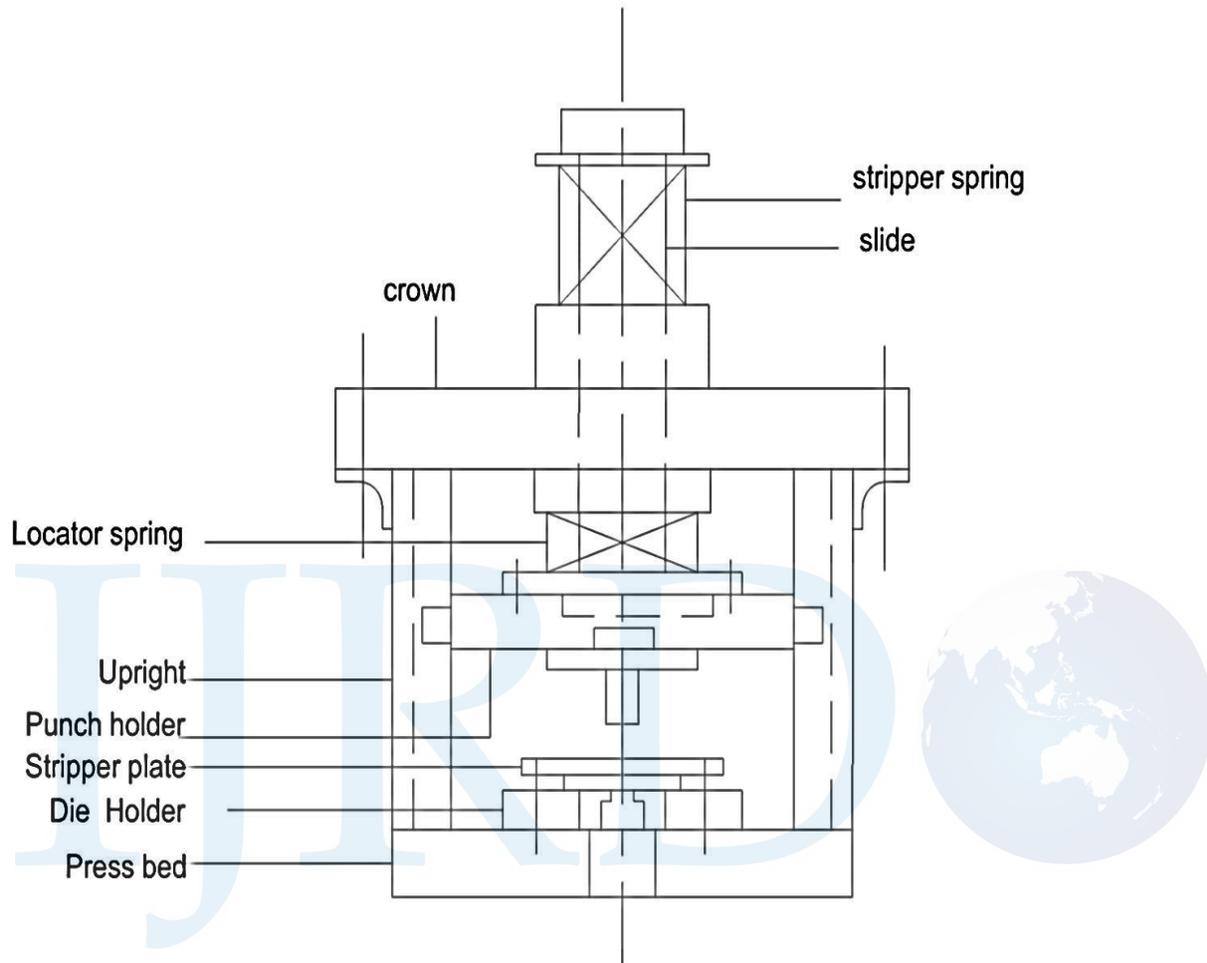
MANUALLY OPERATED PUNCH OR STAMP PRESS ASSEMBLY
